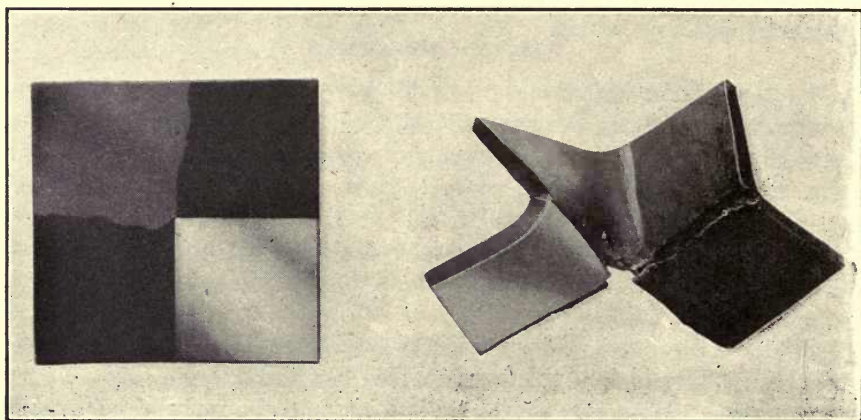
Steel, copper, brass, and bronze welded together.
